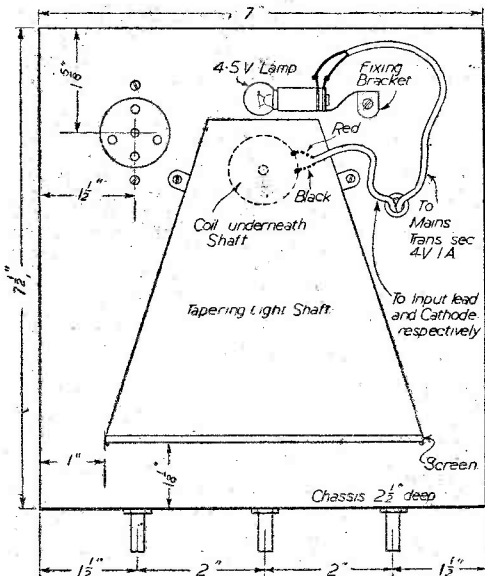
Top-of chassis, showing position of light shaft, and wiring details.
